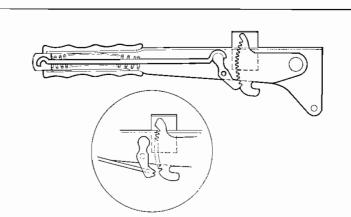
Arrangement of Herald 1200, 12/50 and Vitesse handbrake lever ratchet and pawl. Inset shows Spitfire arrangement
